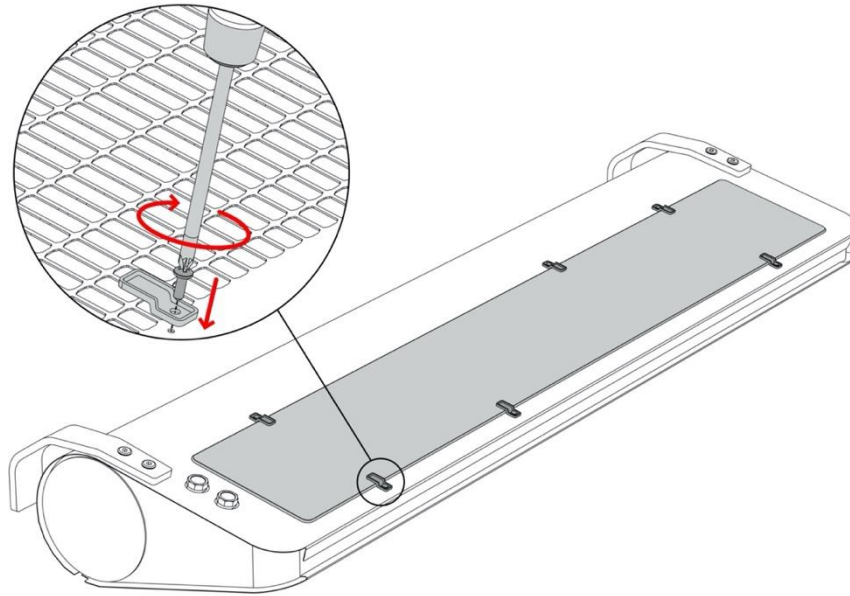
MOUNTING AND EXCHANGING THE AIR FILTER.
